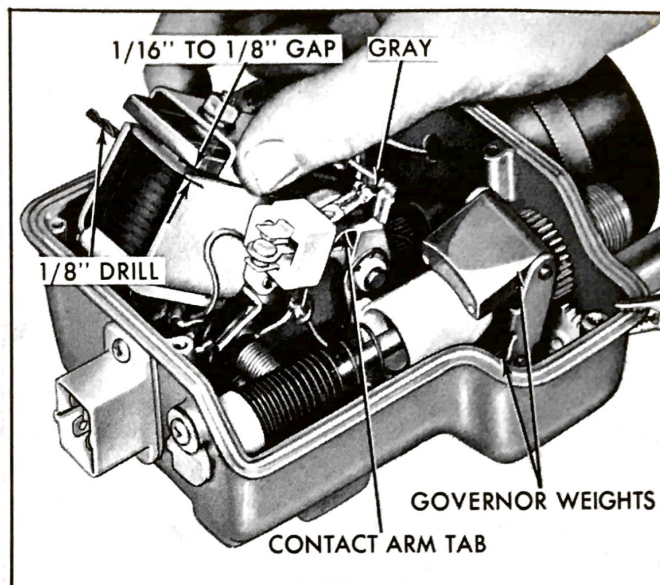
Motor Feed Points Adjustment (Magnet to Locking Arm Gap)
